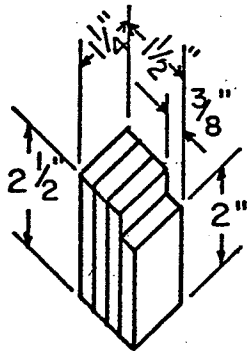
Details of Specimen for Bond Strength Test
